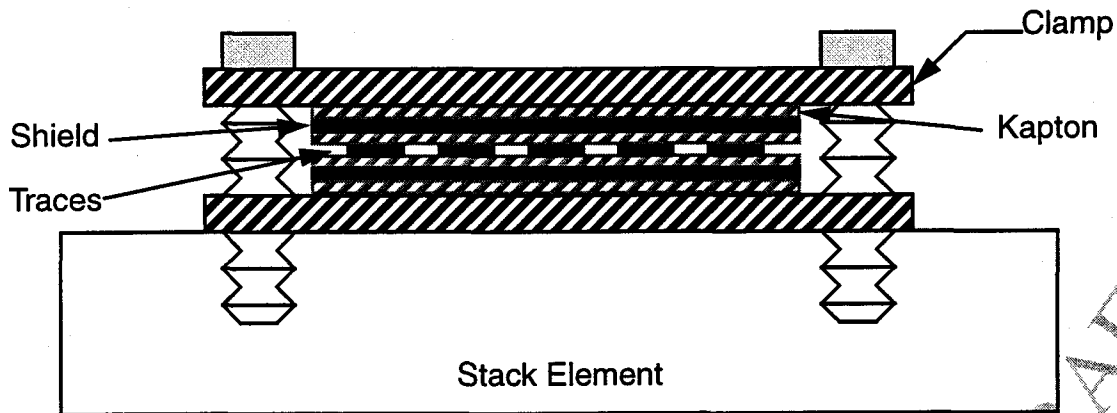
Shielded Cable Configuration Showing Stack Fasteners
